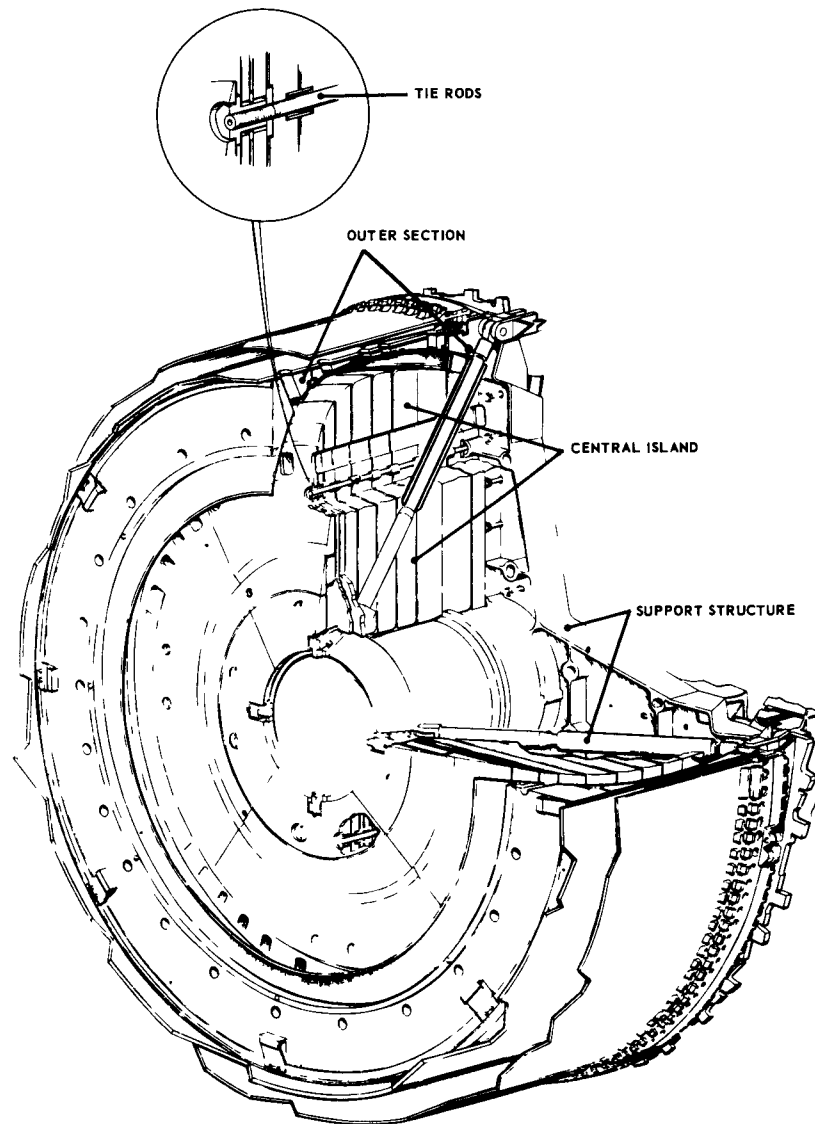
Isometric cutaway view of XNJ140E-1 front shield assembly
